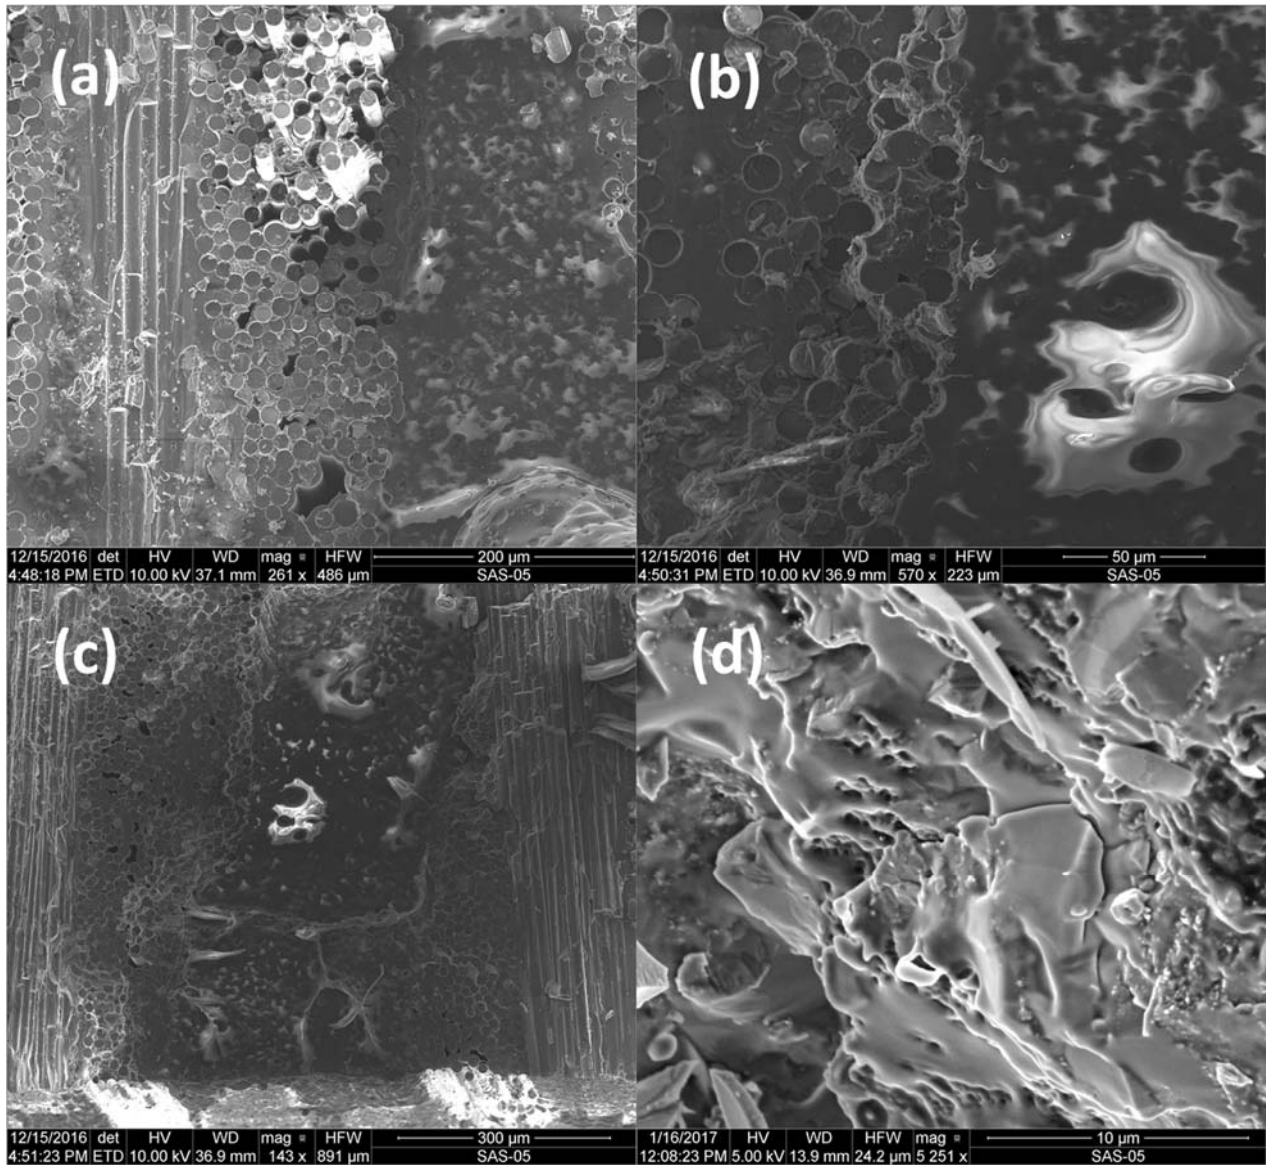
Higher-magnification images of the fracture surface of specimen 16-032 tested in fatigue at 1200°C in steam showing (a) some fiber pull-out amidst glassy layer and fiber-to-fiber bonding at bottom of image; (b) microscope charging on glassy surface; (c) overview of glassy region; (d) non-oxidized matrix fracture surface
